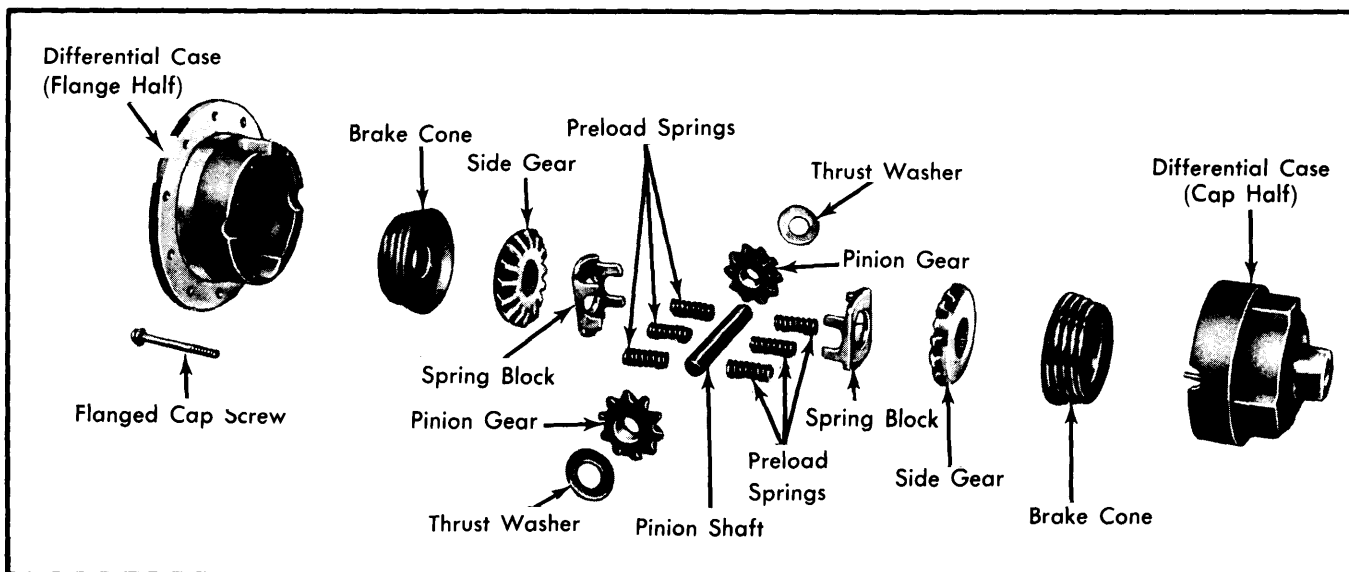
Exploded View of Warner Cone Type Limited Slip Differential Assembly
